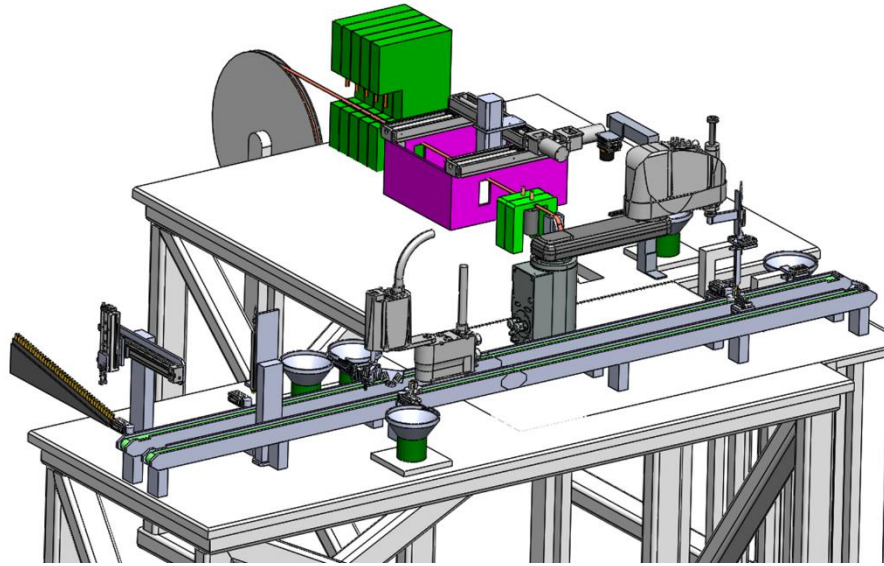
Proposed assembly machine configuration of “laser cutting with punching machines” and one robot and jig in gripper”.
